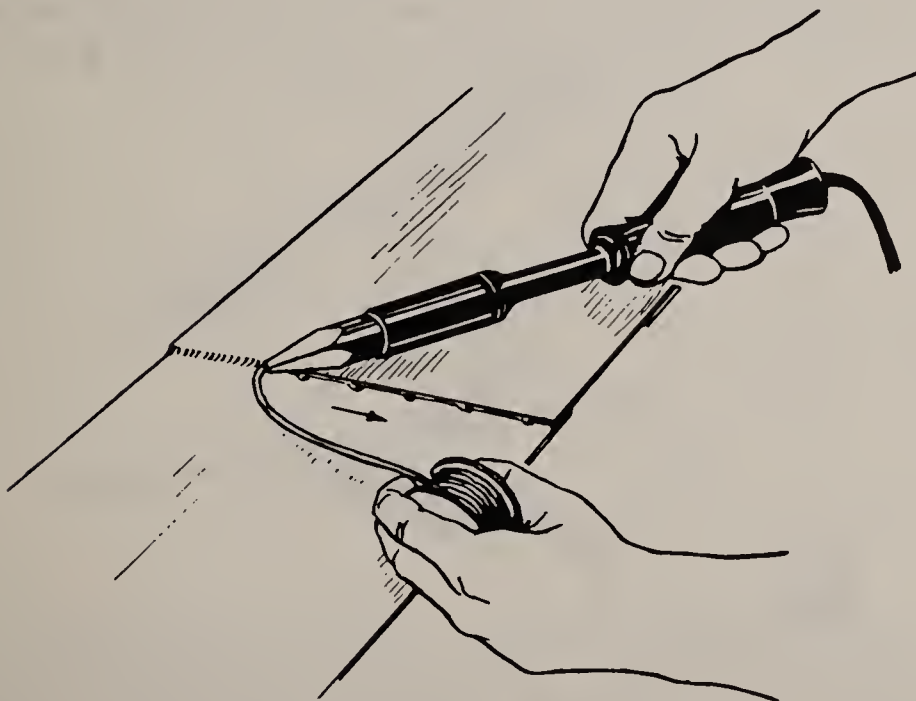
Tin-plate soldering with core solder. Before soldering, clean tin and apply flux. Tack work with drops of solder to hold it together. Apply solder directly to the work, particularly when core solder is used because the flux may evaporate and lose its strength before it does its work.
